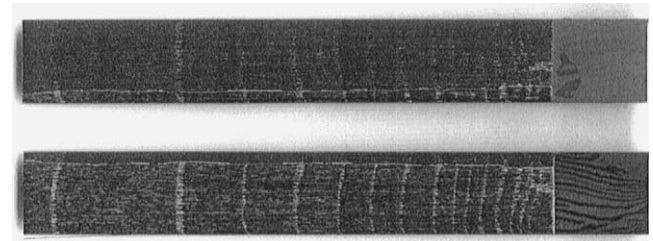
Fracture surface of a DCB tested at room temperature.
